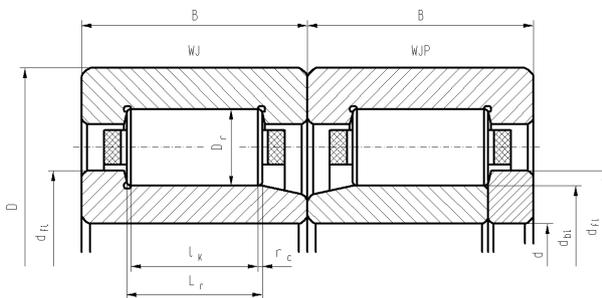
Axle box bearings of a two-axle Intercity passenger carriage bogie.
